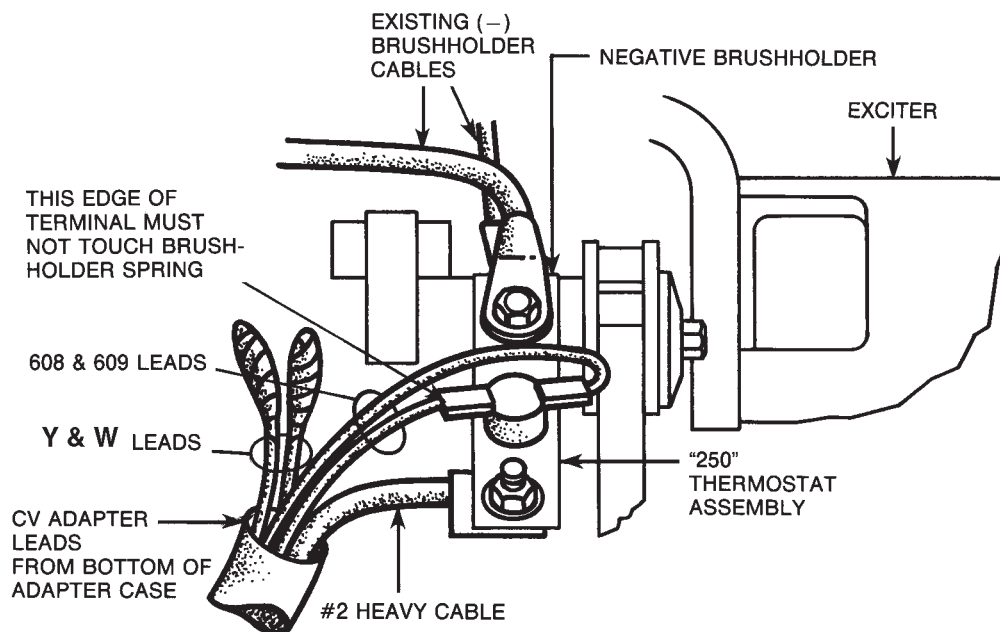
View of Negative Generator Brushholder after Bracket Cover is Removed.
